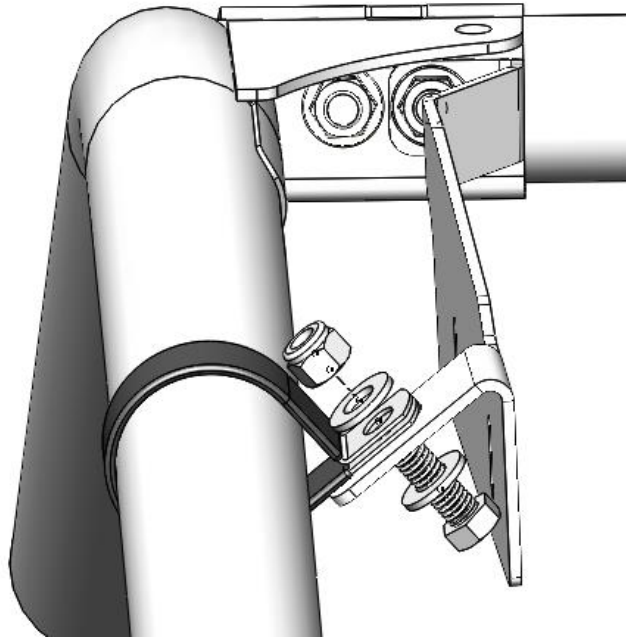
Mount the loop clamp to the bracket. Driver side shown. (Passenger side similar)
